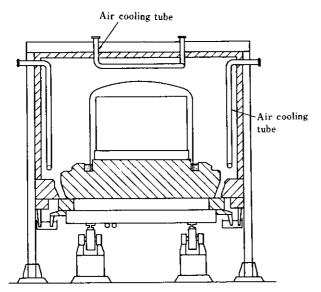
Sectional view of No. 2 cooling zone of KSR-1 furnace
